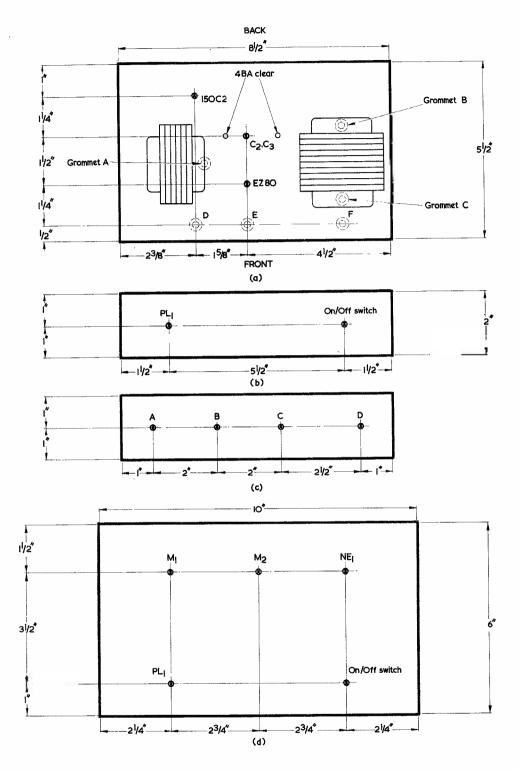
(a) Drilling measurements of the chassis deck, inductors not to scale, (b) chassis front apron, (c) chassis rear apron and (d) the front panel
